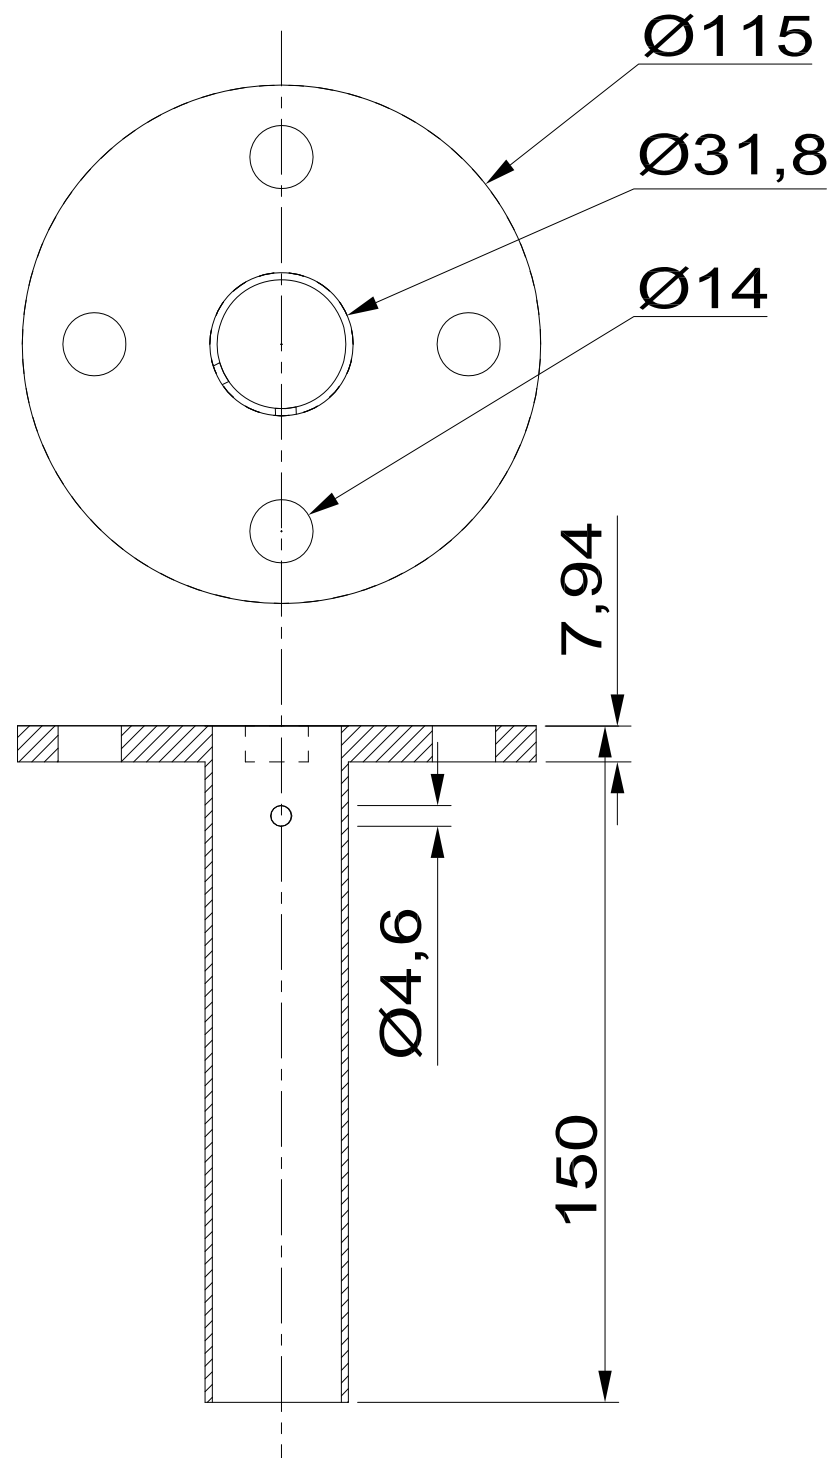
Profile of the exit section with main dimensions, all dimensions in mm.
